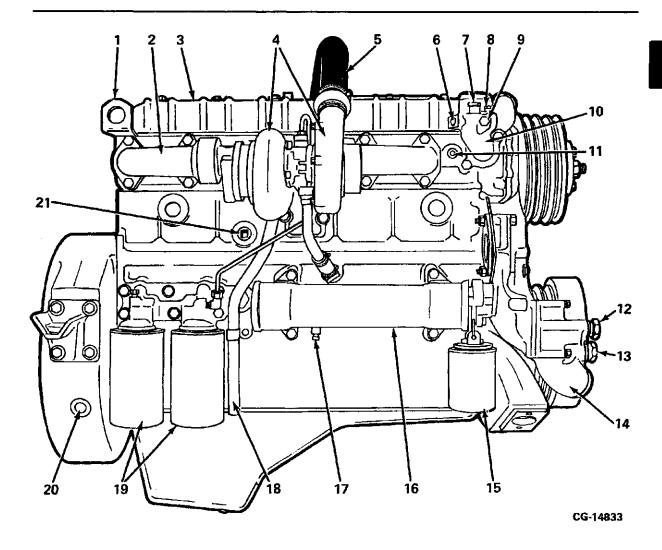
Major Component Location (Right Side) (DT-360 Shown)
